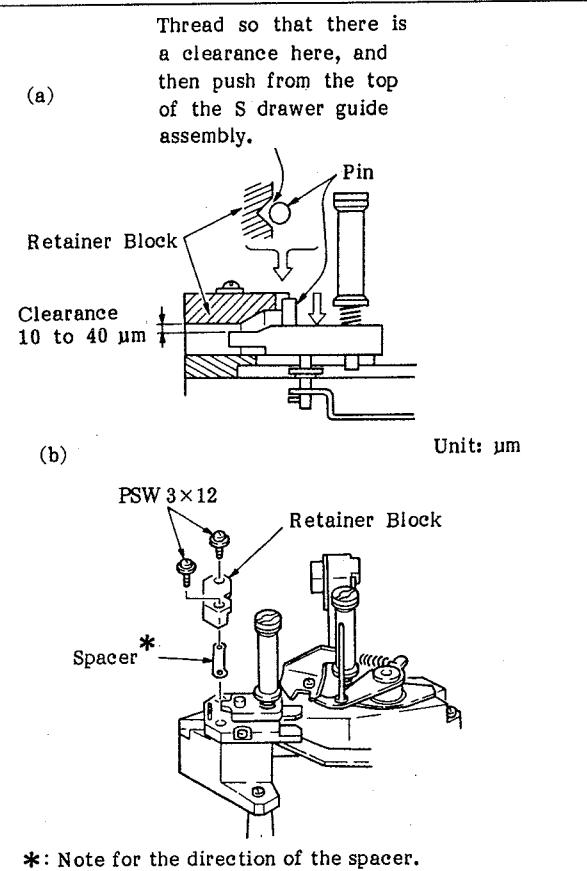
Adjustment of the Clearance between the Retainer Block and the S Drawer Block
